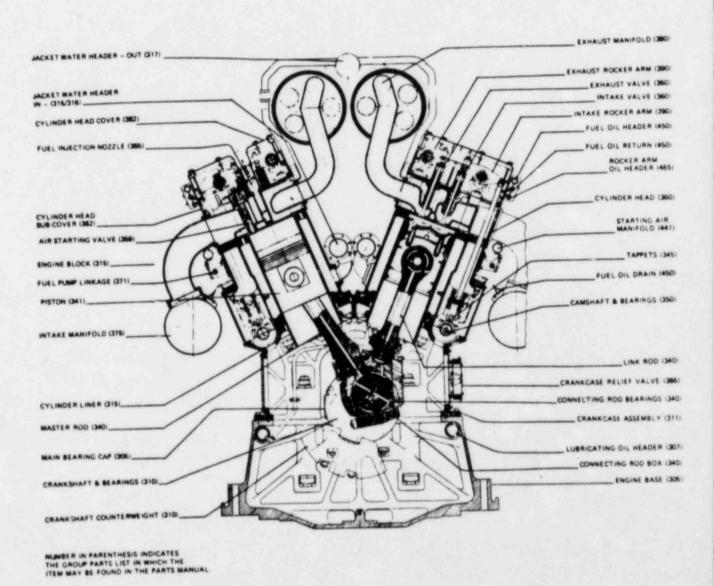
Cross Section, Typical Model RV Diesel Engine.
